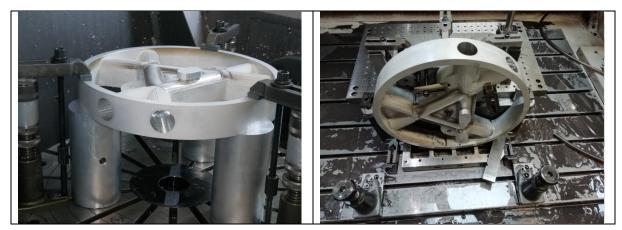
Milling (left) & EDM (right) of the beam port tubes
